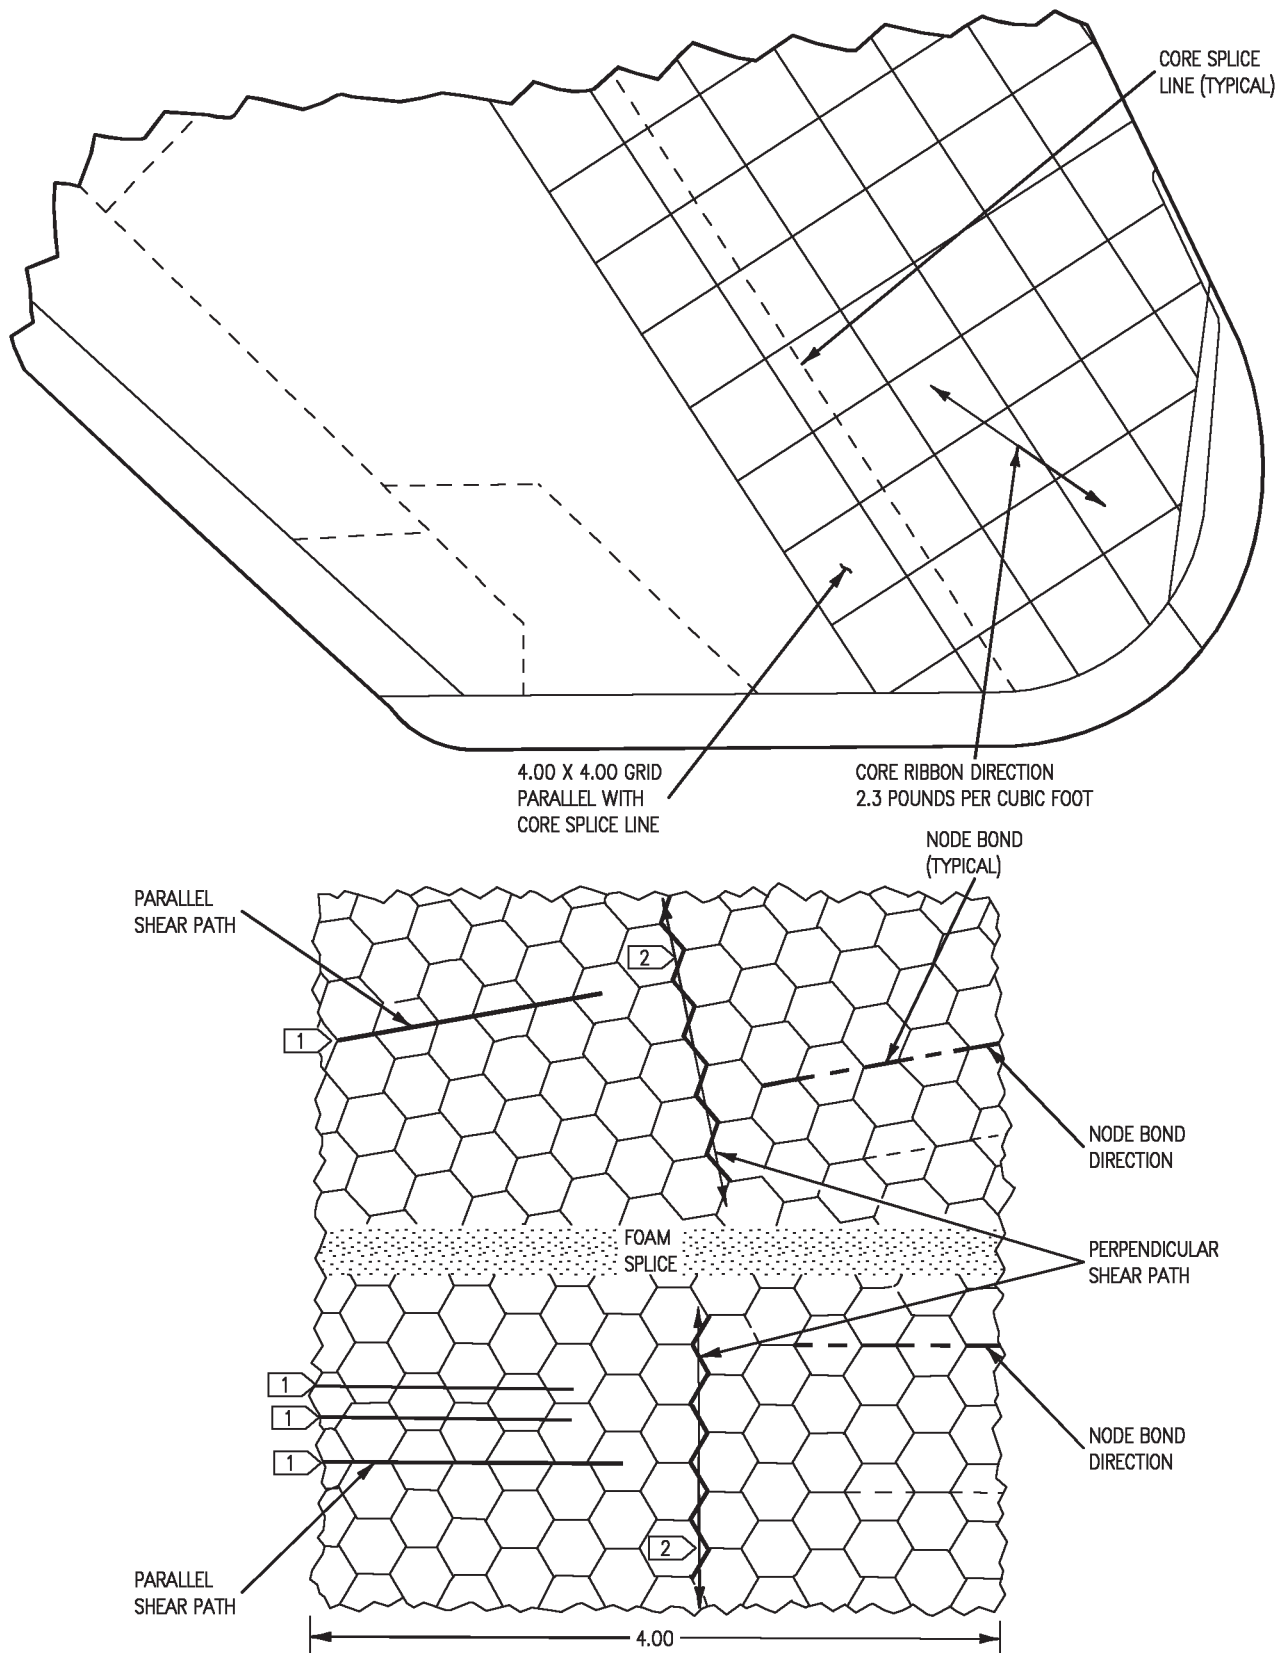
Definition and Examples of Shear Path Failure (Sheet 1)
